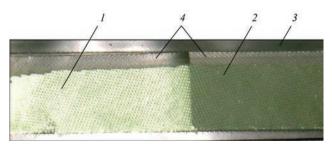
Weld of Unisol 950 laminated fabric with local lacks-of-penetration in the weld after testing for tearing off of the connecting strip: 1 — torn off tape with exposed cord; 2 — weld; 3 — HAZ near the weld; 4 — region of lack-of-penetration on the tape and on the weld
